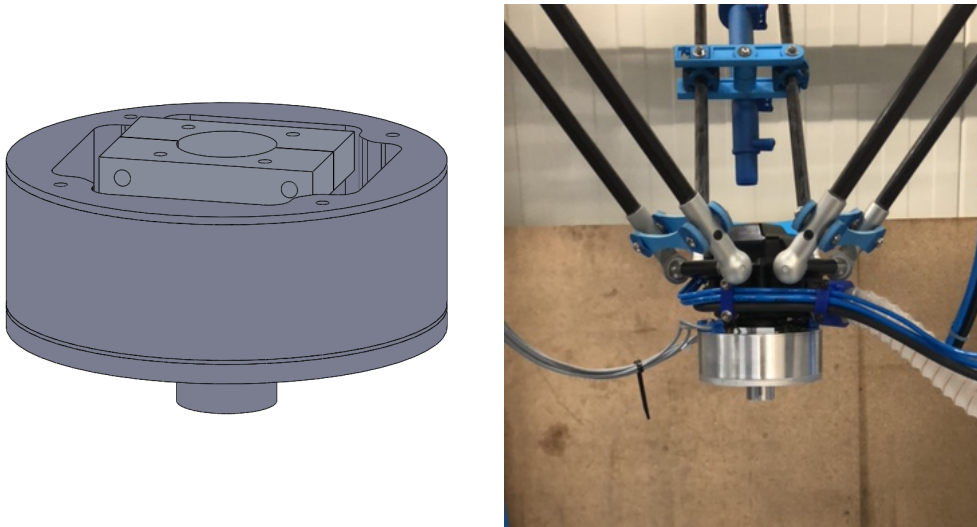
The designed sensor in Solidworks and the sensor attached to the case packing robot after fabrication
